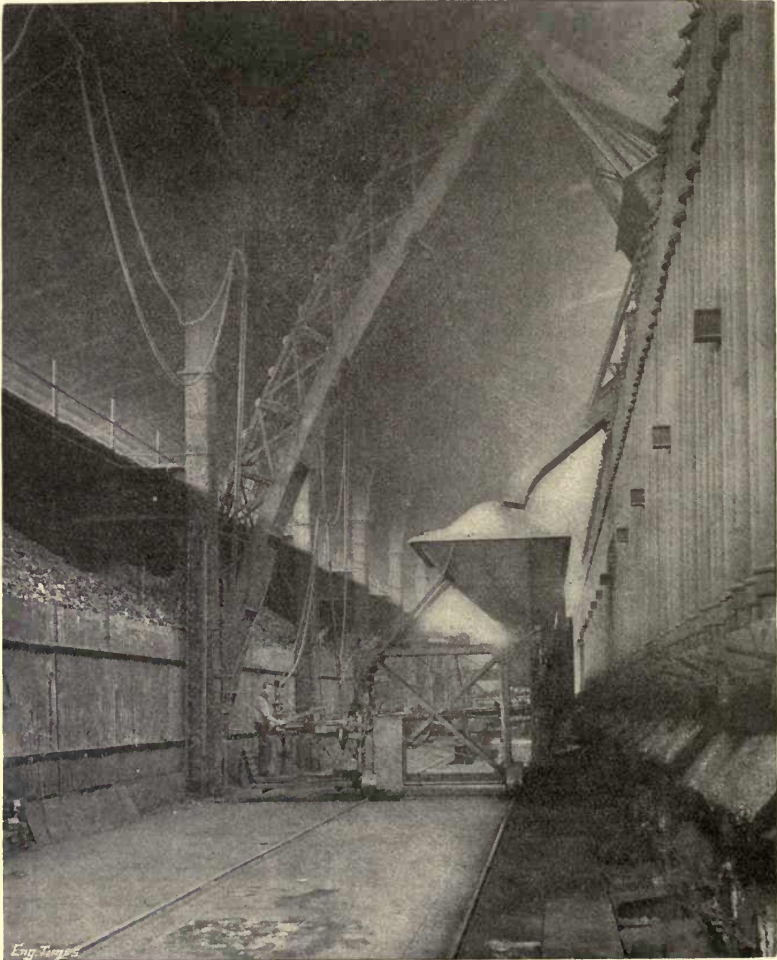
ARROL-FOULIS STOKING MACHINERY AT BECKTON GASWORKS.
